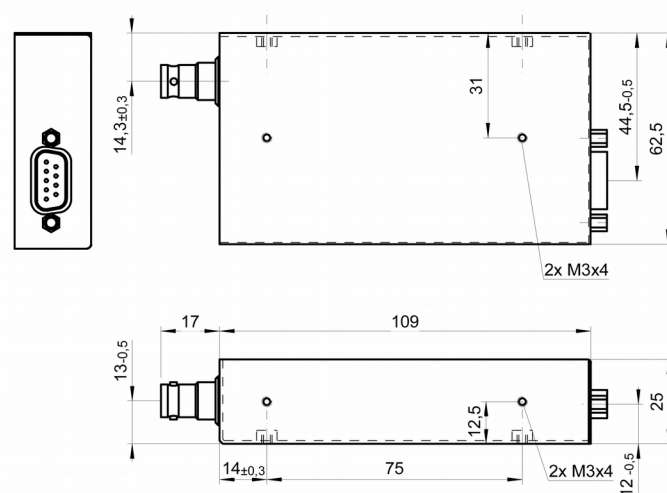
dimensional drawing DPSmini ≤ 6kV / SHV
